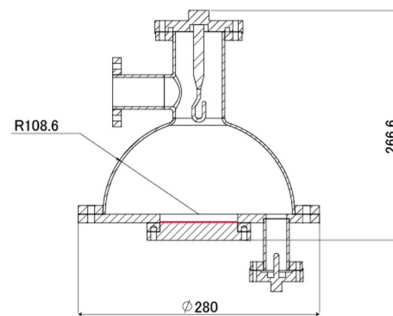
Cross-sectional drawing of mushroom-shaped Nb cavity. (Red line shows sample surface.)
